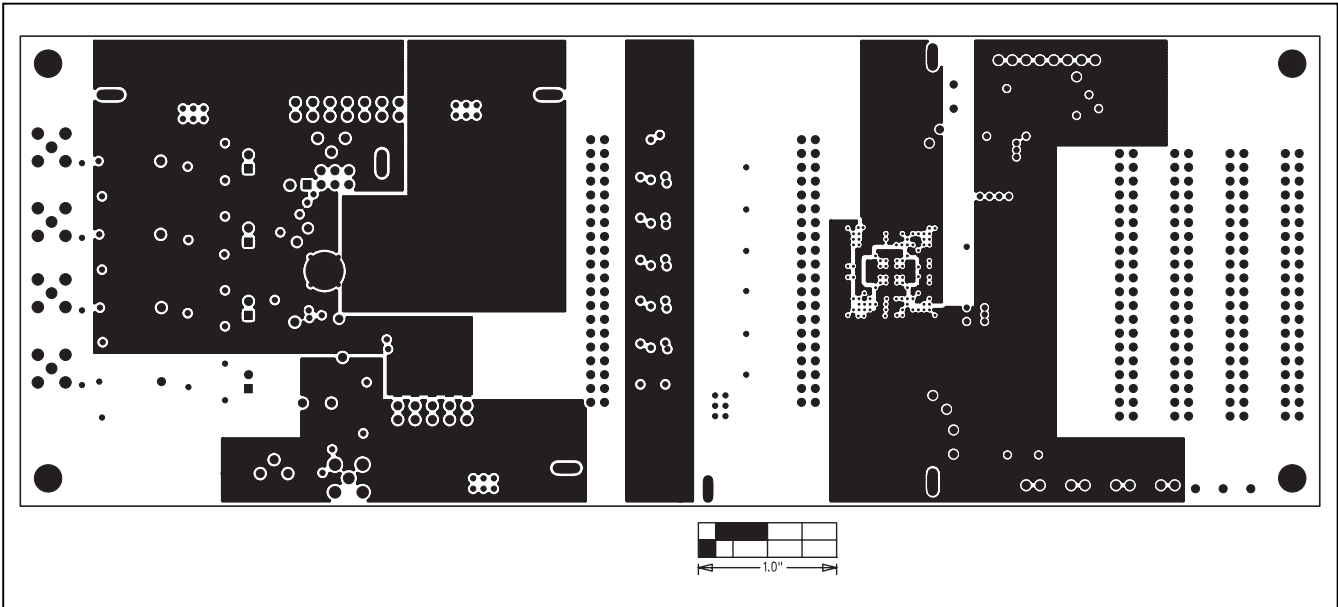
MAX1127 EV Kit PC Board Layout (Inner Layer 3)—Power Planes
